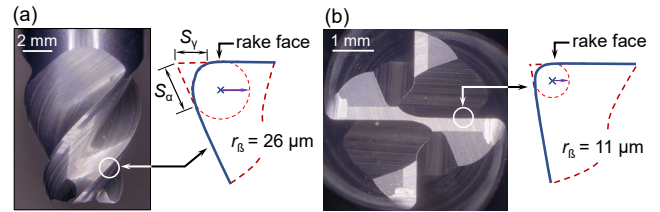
Edge geometry of tapered helical solid carbide end mill.
